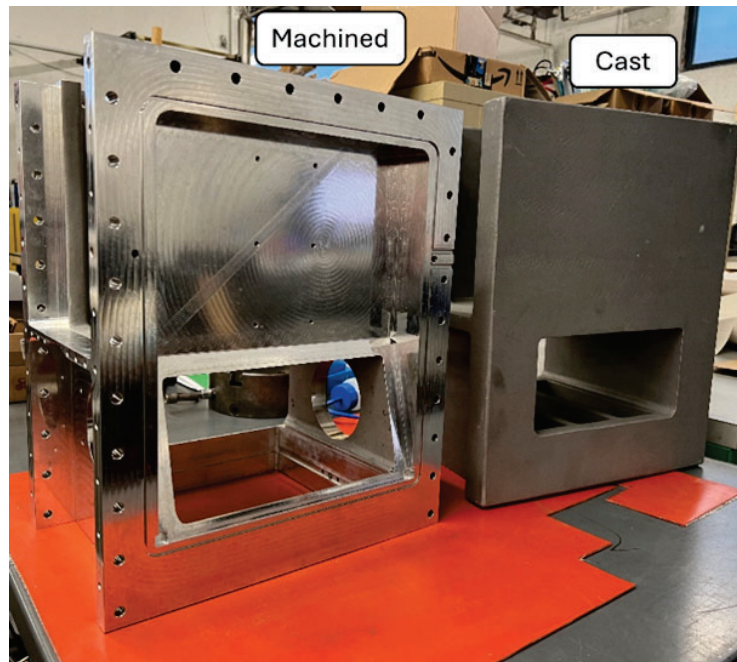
A final machined module is shown next to the cast module from which it is made.
